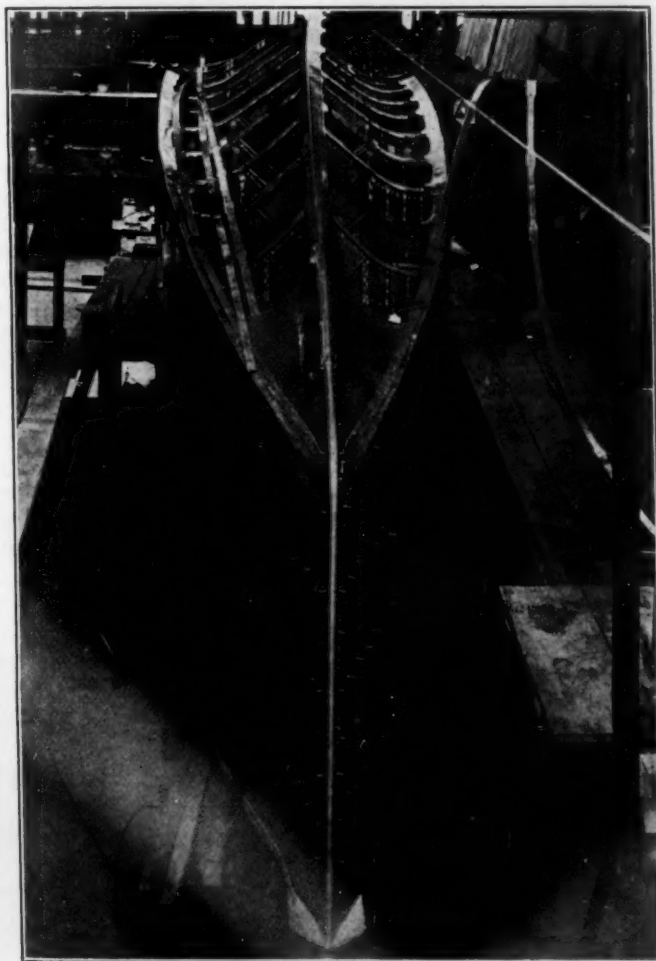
V-SHAPED BOTTOM OF TYPE Ro VII
